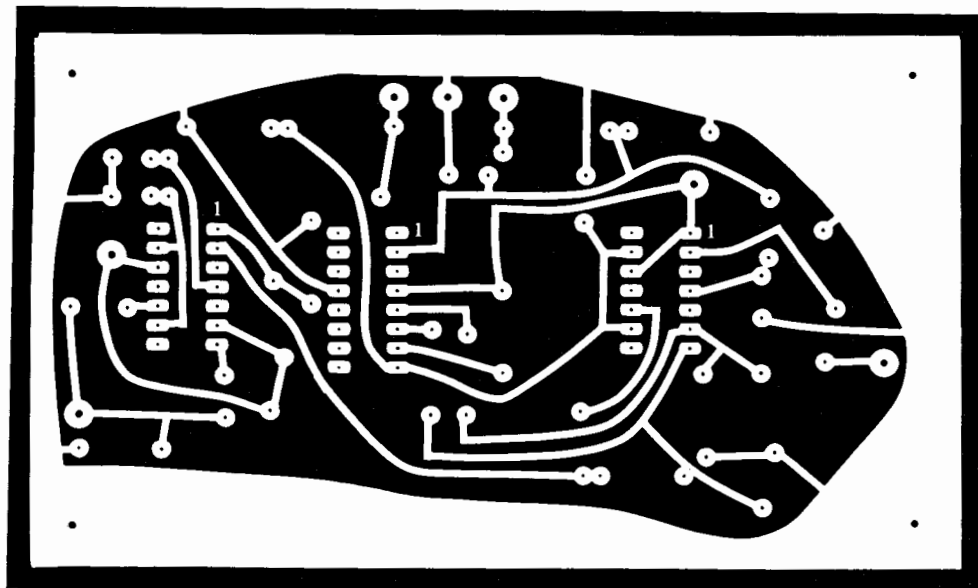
Etching and drilling guide for the pc board is at right. Component layout shown above.
